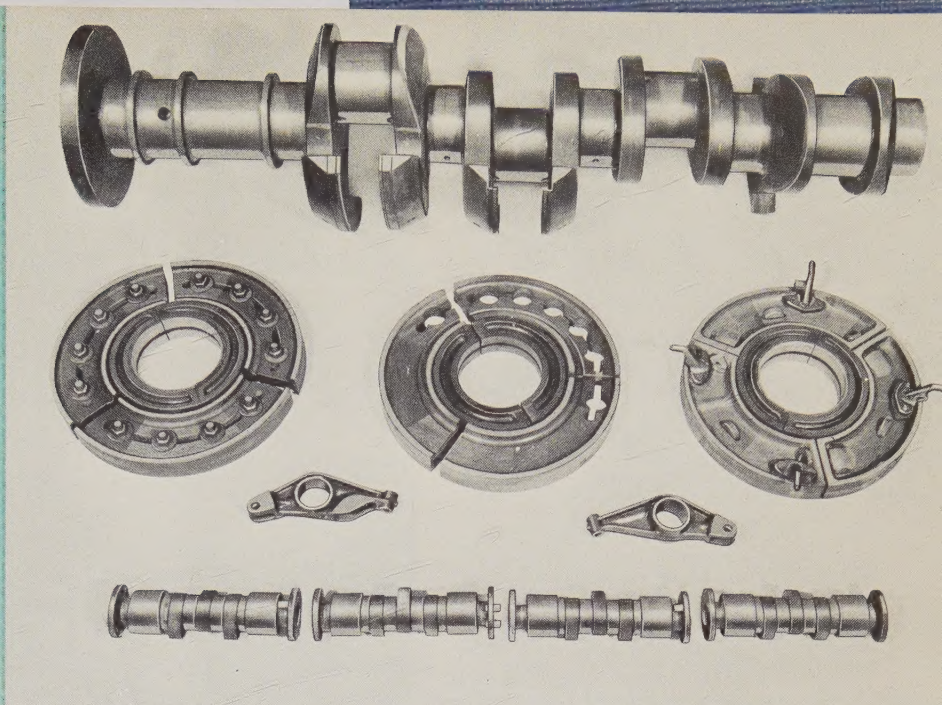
Among the many parts for which wooden models were made for study were (top to bottom) a crankshaft, three different main-bearing designs, exhaust and injector rocker levers, and a camshaft in four sections. The models helped to determine how final designs could be improved.
